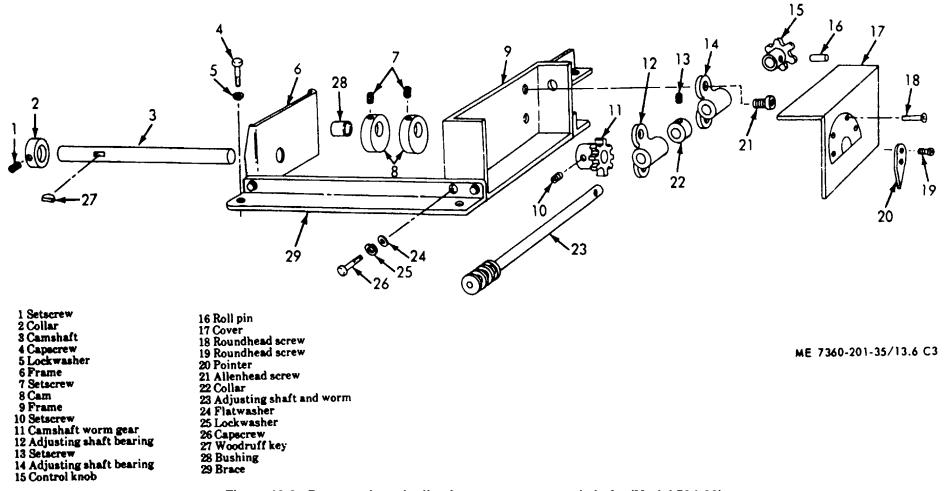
Pressure board adjusting cams, gears, and shafts (Model 534-68).
